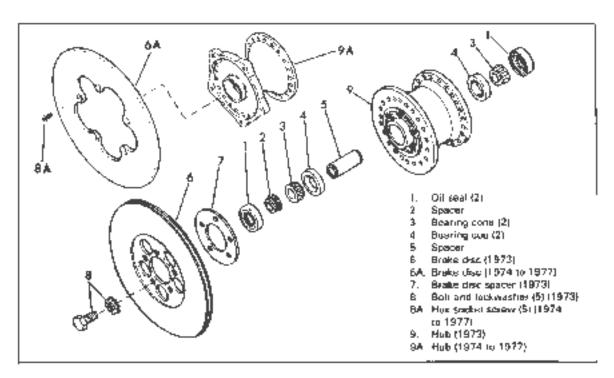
, FX - Front Wheel Hub - Exploded View (1873 to 1977)
